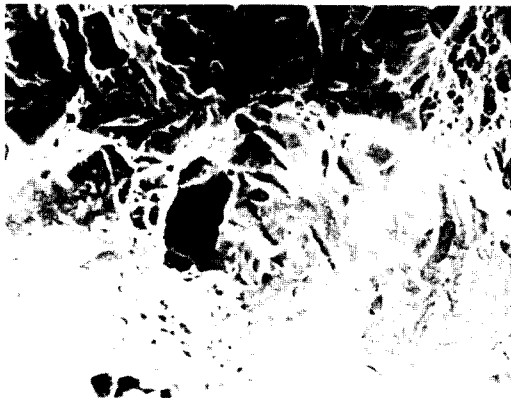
Fracture surface of SNCM645 friction welding joints in optimum zone by SEM (×1000)
